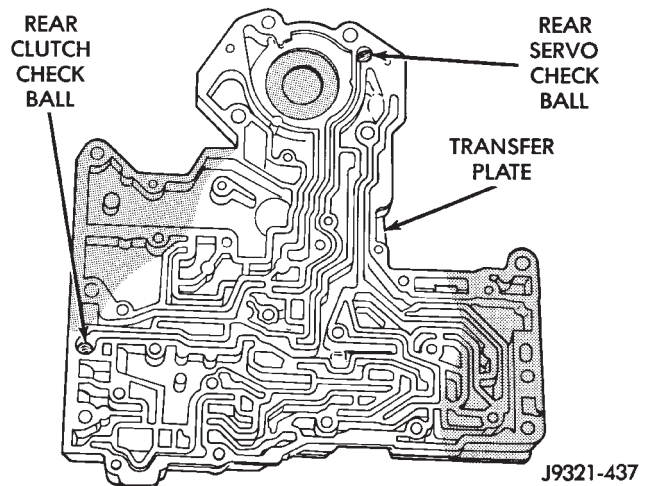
Rear Clutch And Rear Servo Check Ball Locations
